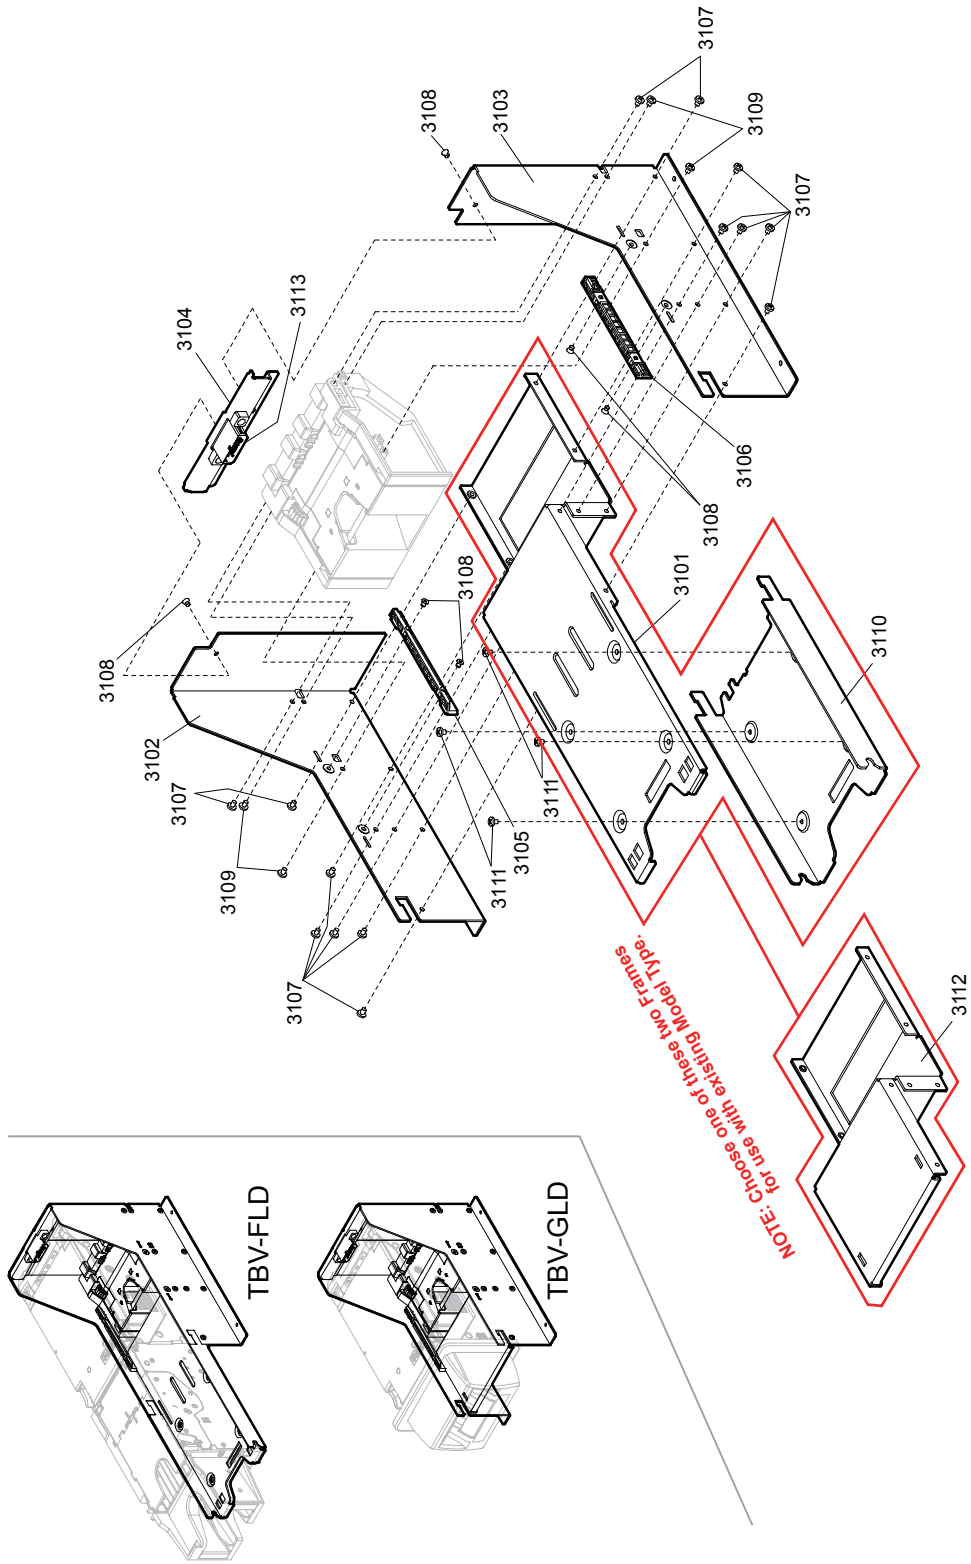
TBV FLD/GLD Frame Unit Exploded View 1
